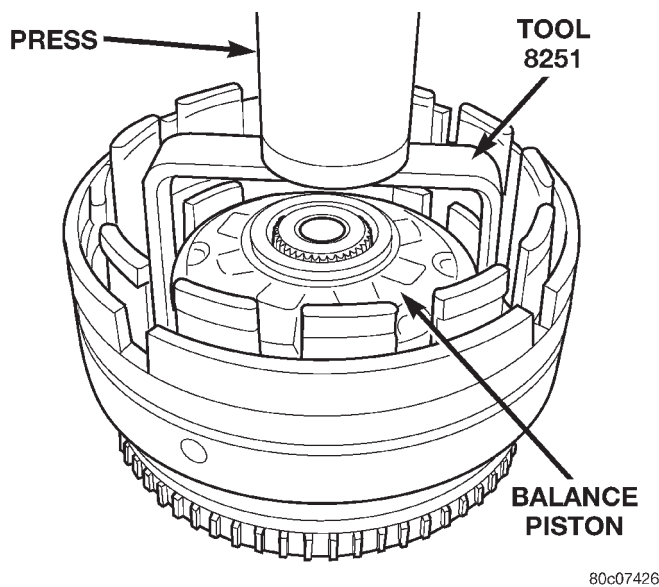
Compressing UD/OD Balance Piston Using Tool 8251
